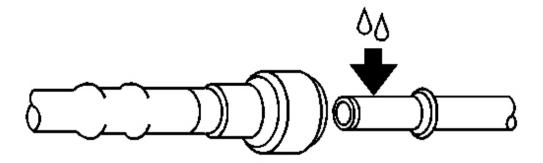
Oiling Male Pipe Ends (Metal Collar) Courtesy of GENERAL MOTORS CORP.
